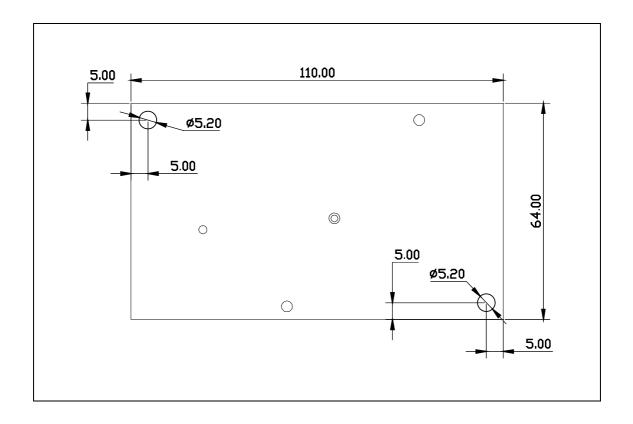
Heatsink plate for MS2 (upper view).The thickness of the plate is 6.0 mm (0.24 in).
